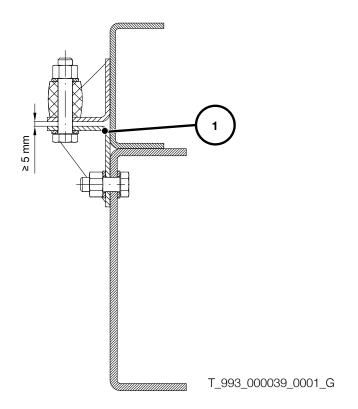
IV: Flexible body fastener with projecting platform corner pieces
